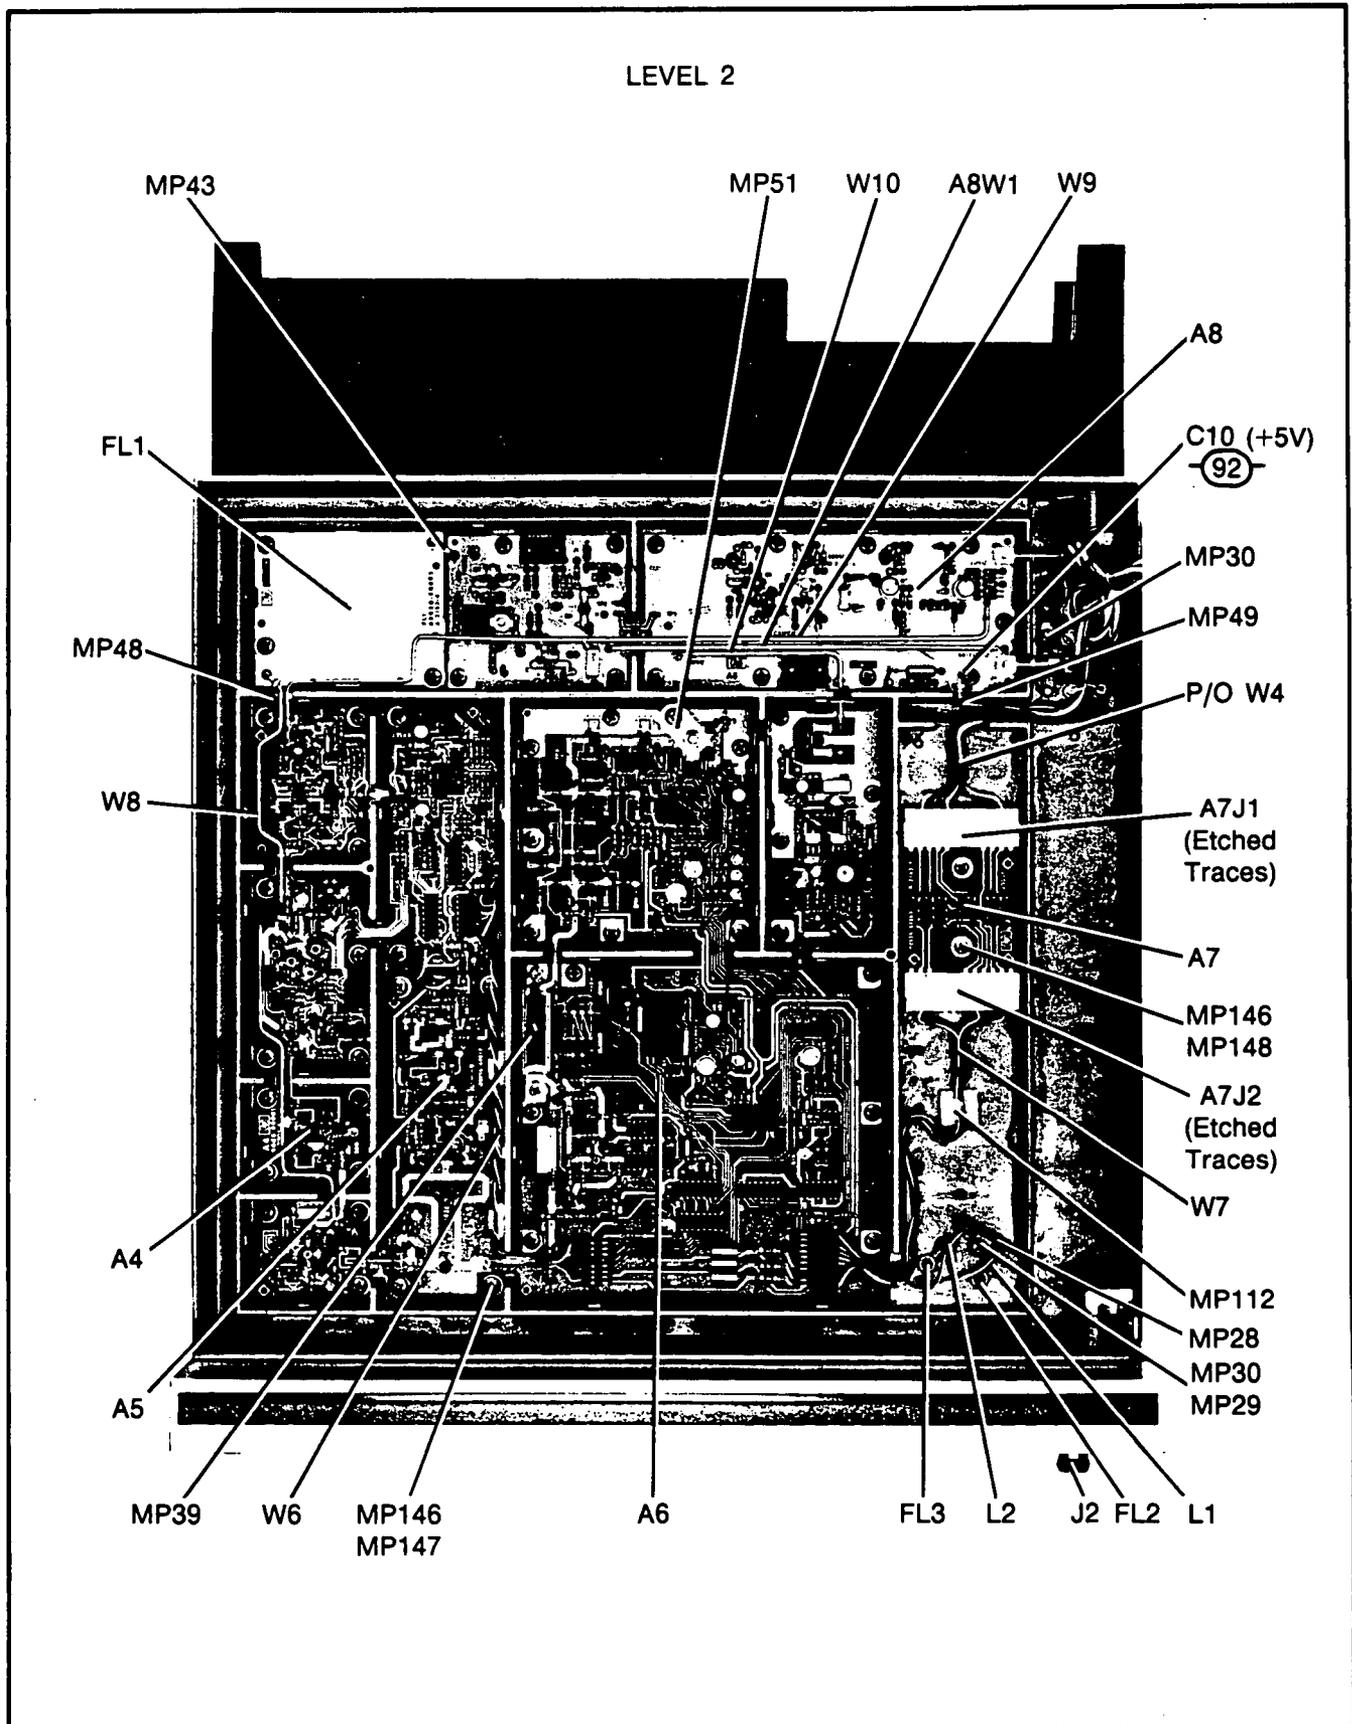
(2425A to 2509A). Top Internal View; A3 Assembly in Service Position
